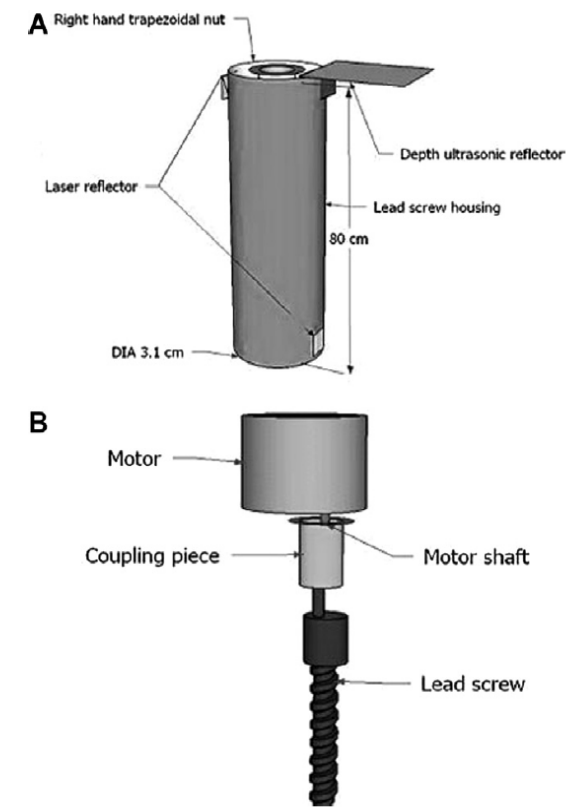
(A) The lead screw housing with the laser reflectors, trapezoidal nut and depth reflector. (B) Coupling piece connecting the gear motor to the lead screw.
